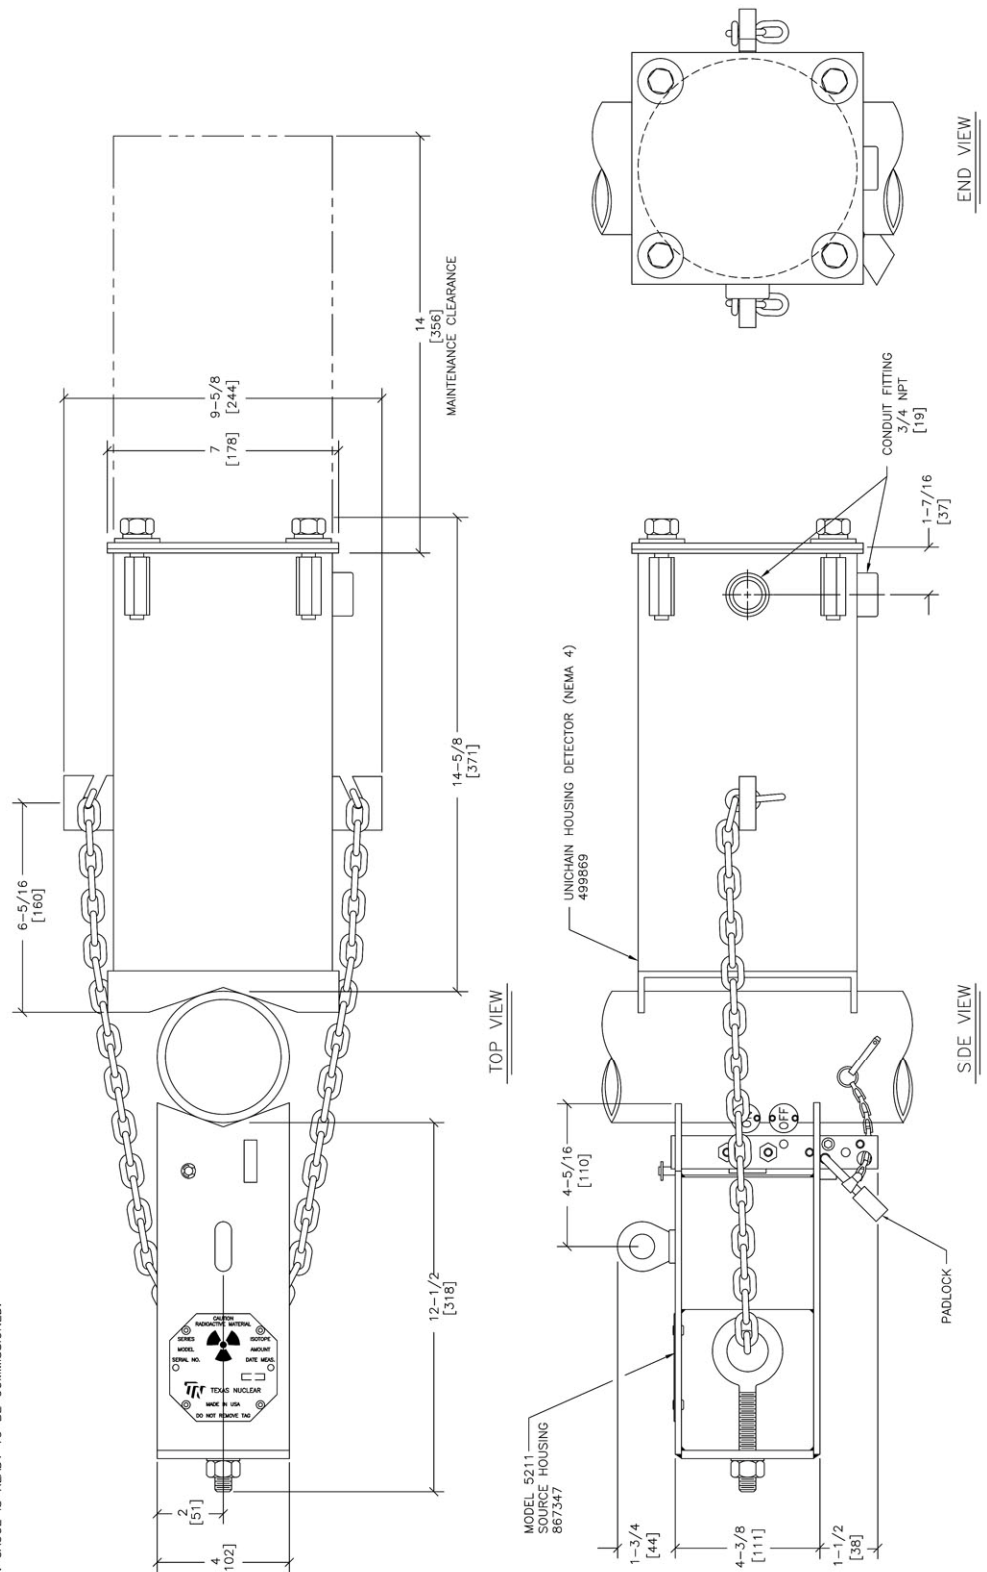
867456: Installation drawing, source/detector assembly single chain mount, NEMA 4 housing (sheet 1 of 1)
